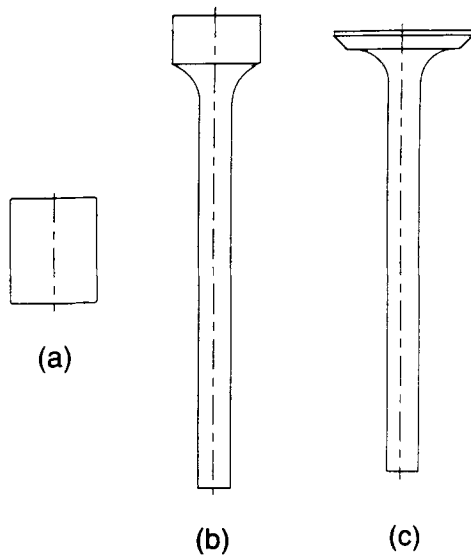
Different stages in manufacture of exhaust valve. (a) Initial slug. (b) After extrusion. (c) Final forged valve.
